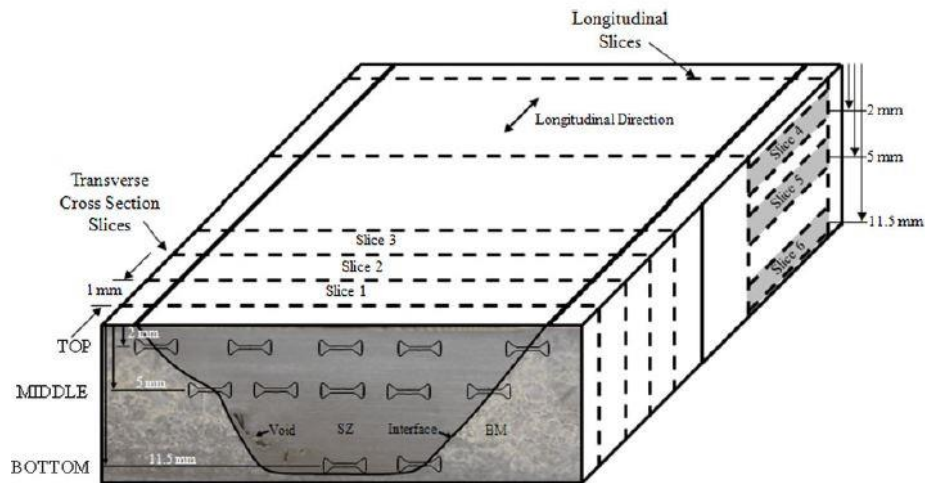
Schematic of weld showing transverse cross-section and longitudinal slices [12].
